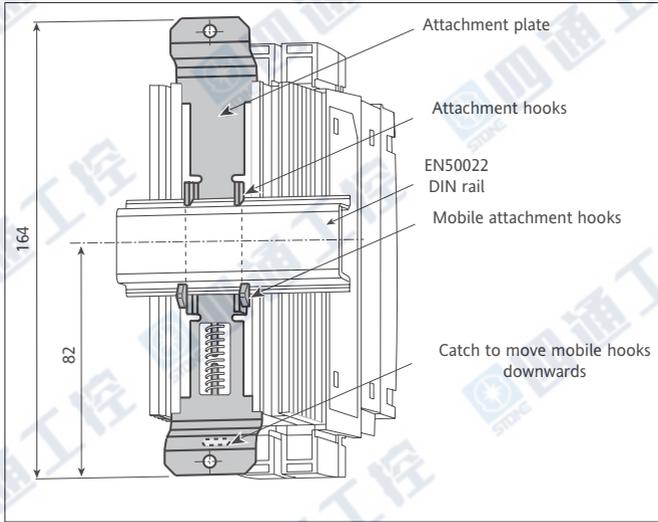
Attaching the 7100A power thyristor unit to a DIN rail (16A to 63A, rear view)
